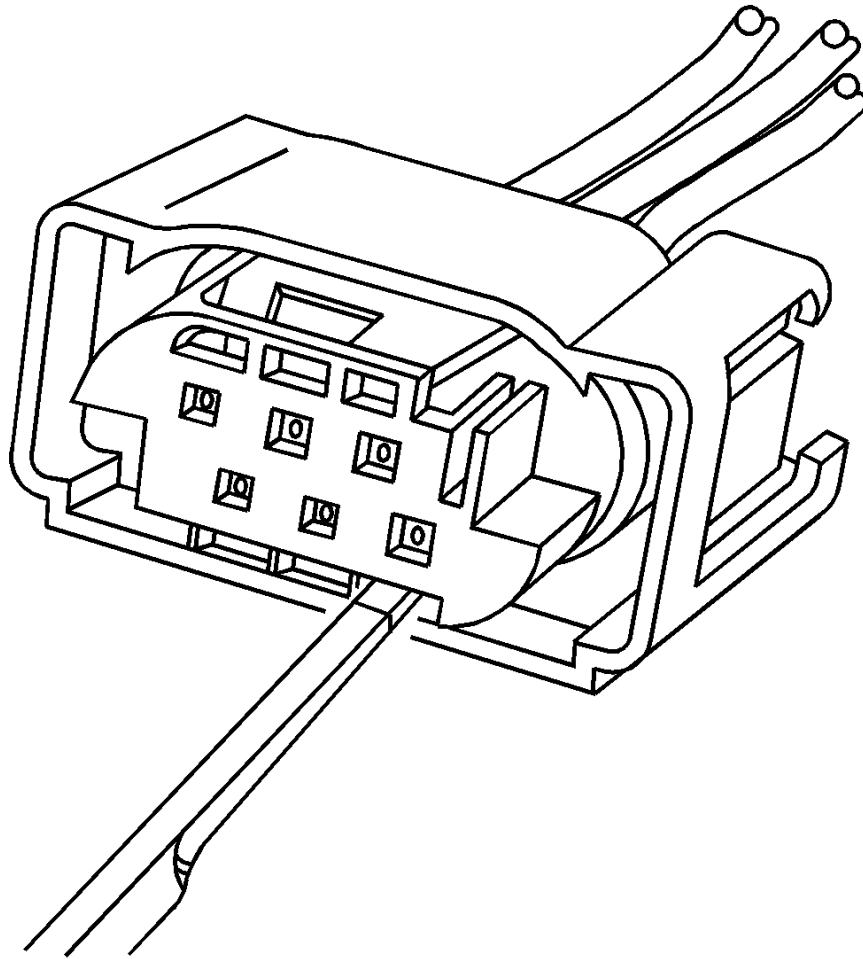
View Of Inserting Special Tool Into Lower Right Face Cavity
